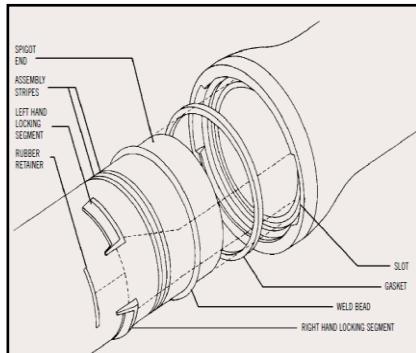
Assembled TR FLEX® Pipe Joint - Typical 4" - 36" Sizes
